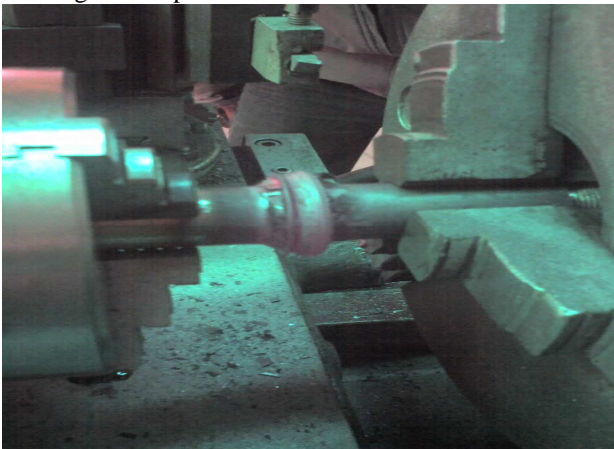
Shows the Friction Welding of AISI 304 Specimen.
